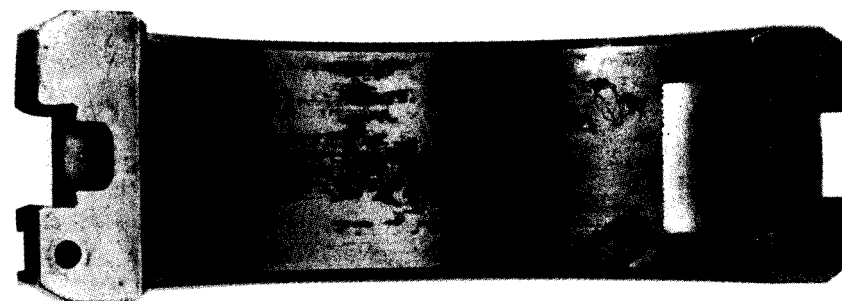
Combined cavitation and fatigue damage of journal bearing.
